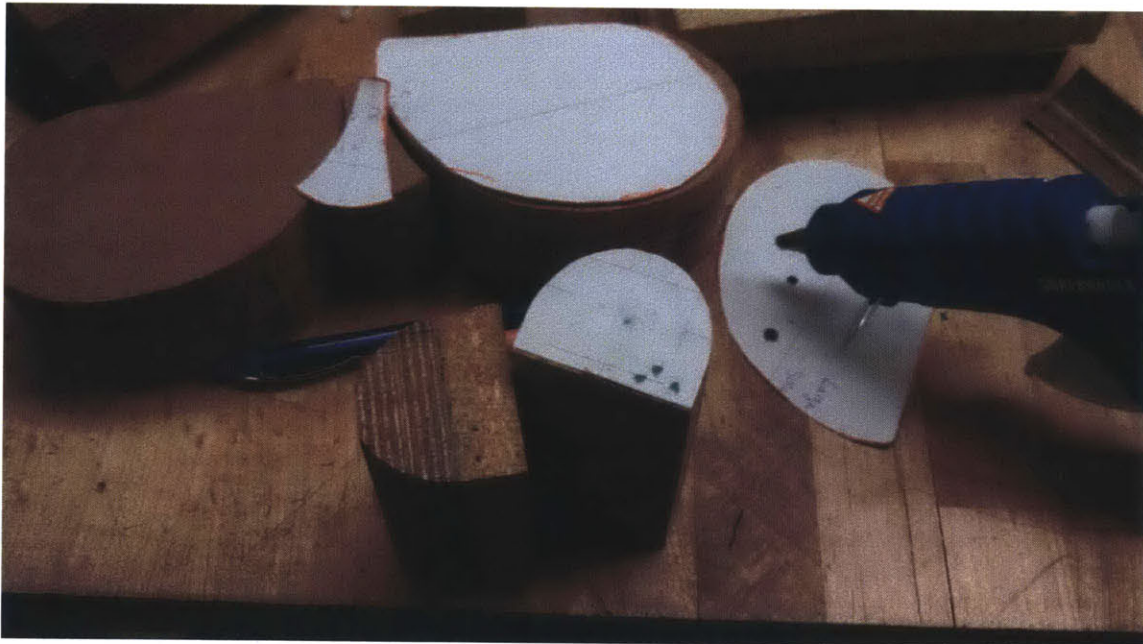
Using the flattened geometries of the CAD model to construct the eyes.
